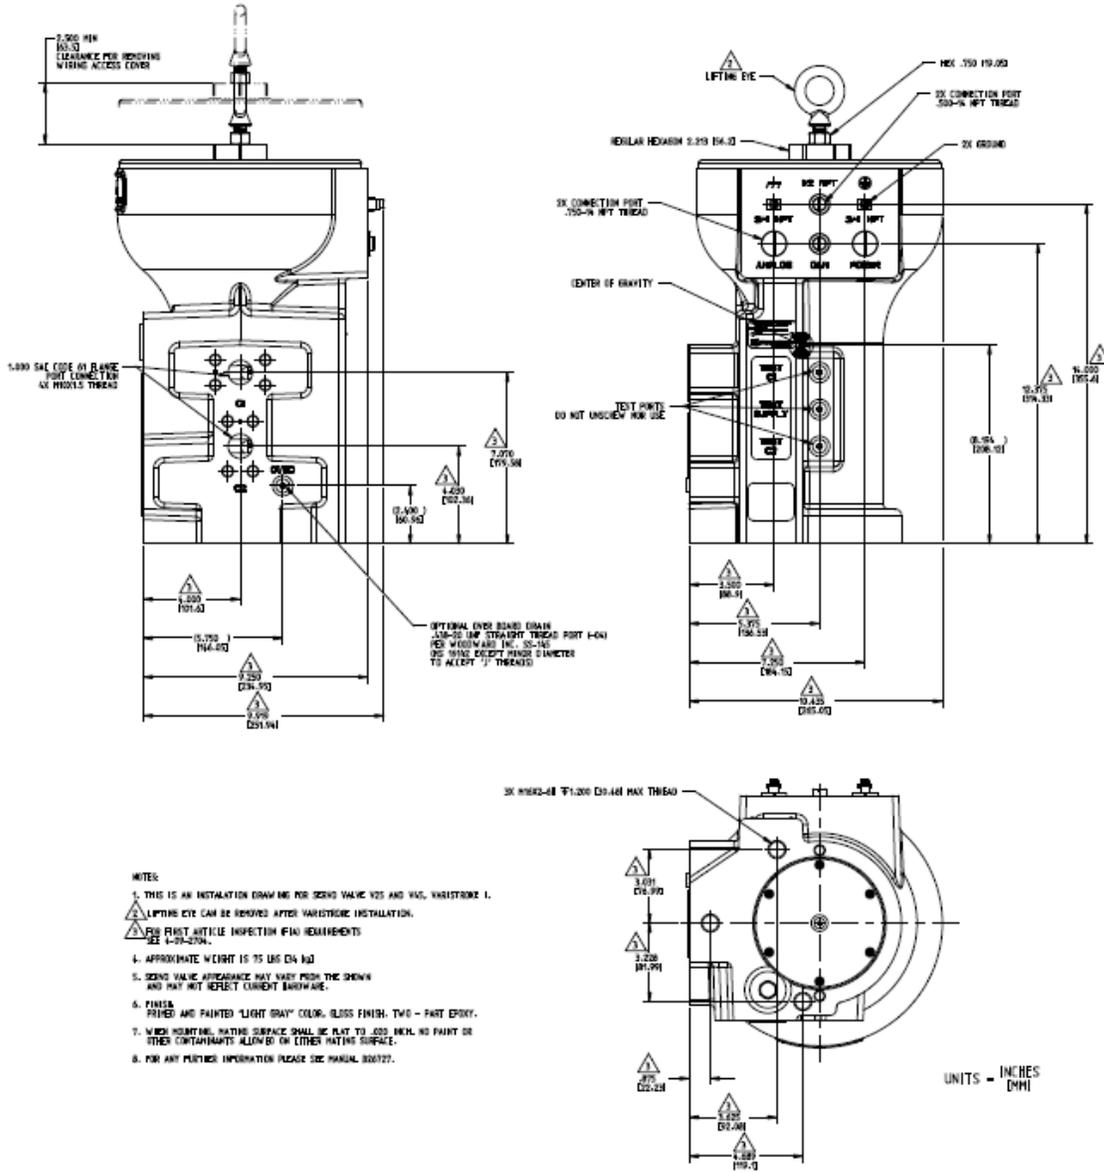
Typical VS-I Remote Servo Installation Dimensions
